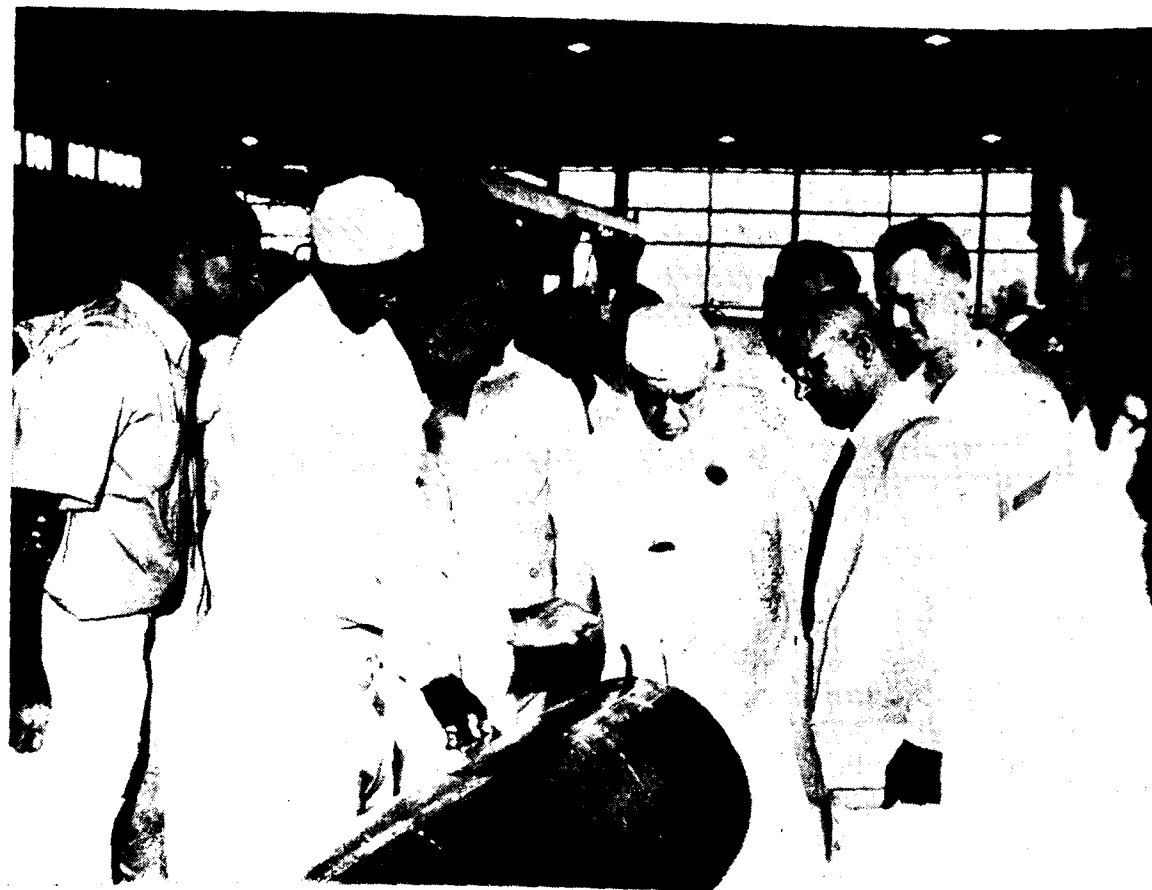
Prime Minister Nehru inspecting an API pipe. (Photo: Mannesmann-Meer AG)
